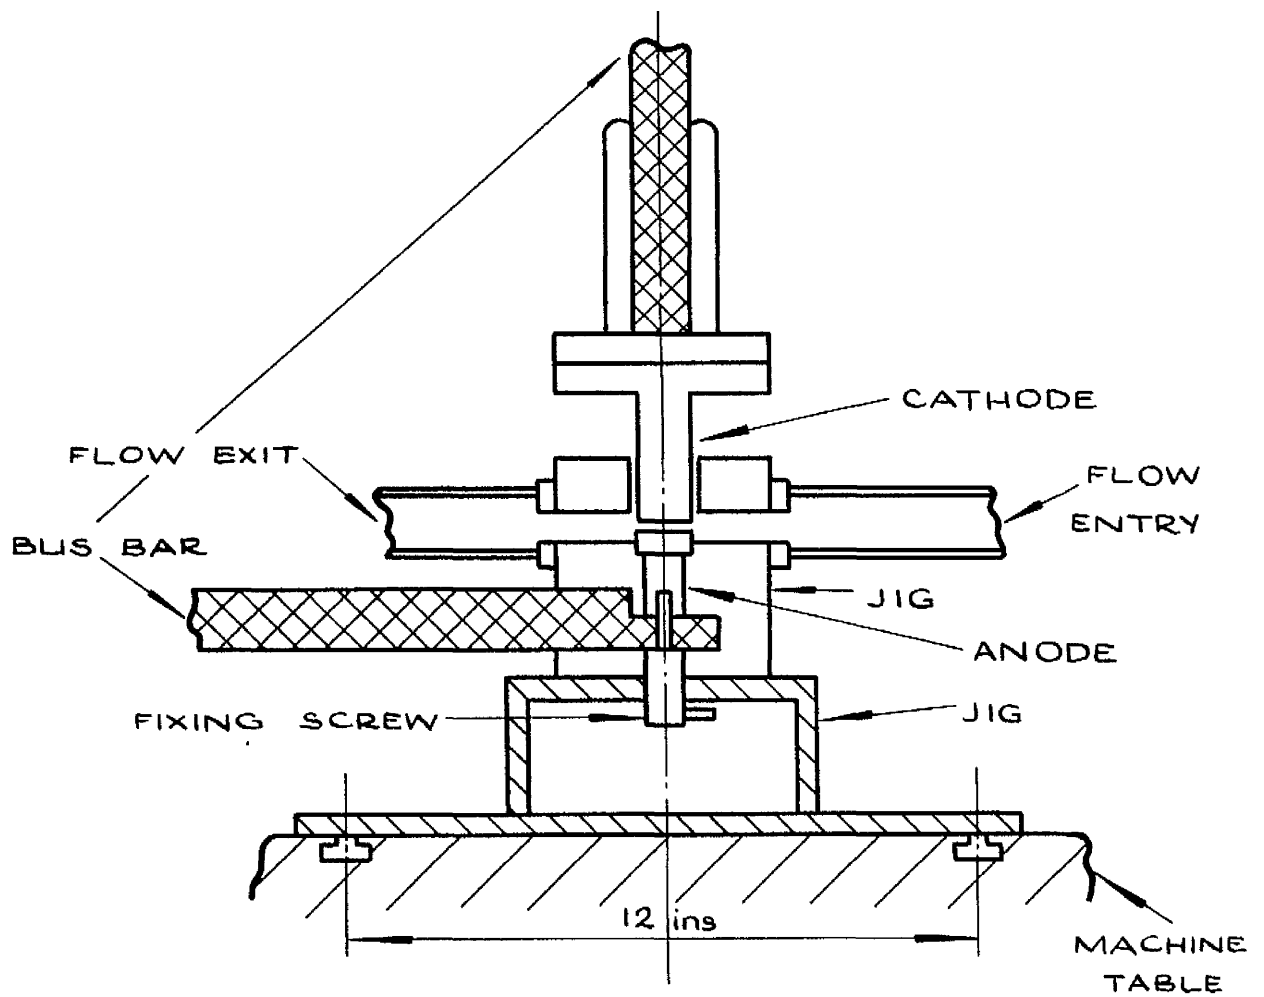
DETAIL OF TYPICAL JIG USED WITH BARMAX MACHINE
